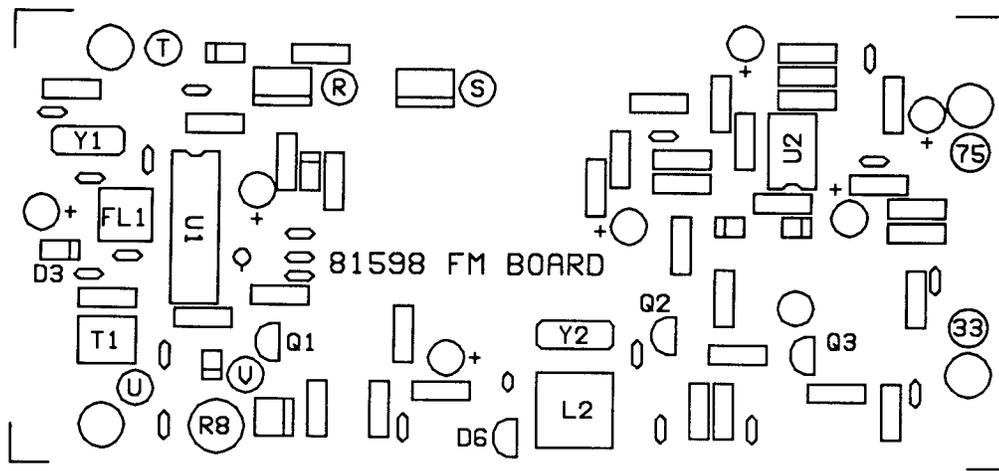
FM BOARD COMPONENT LAYOUT (81598)
